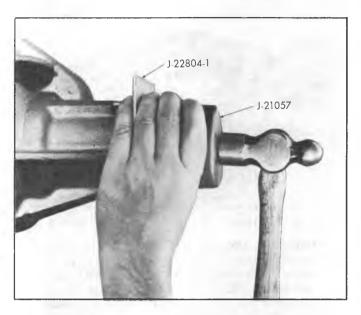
B-Drive Pinion Flange Oil Seal Installation (Heavy Duty)
